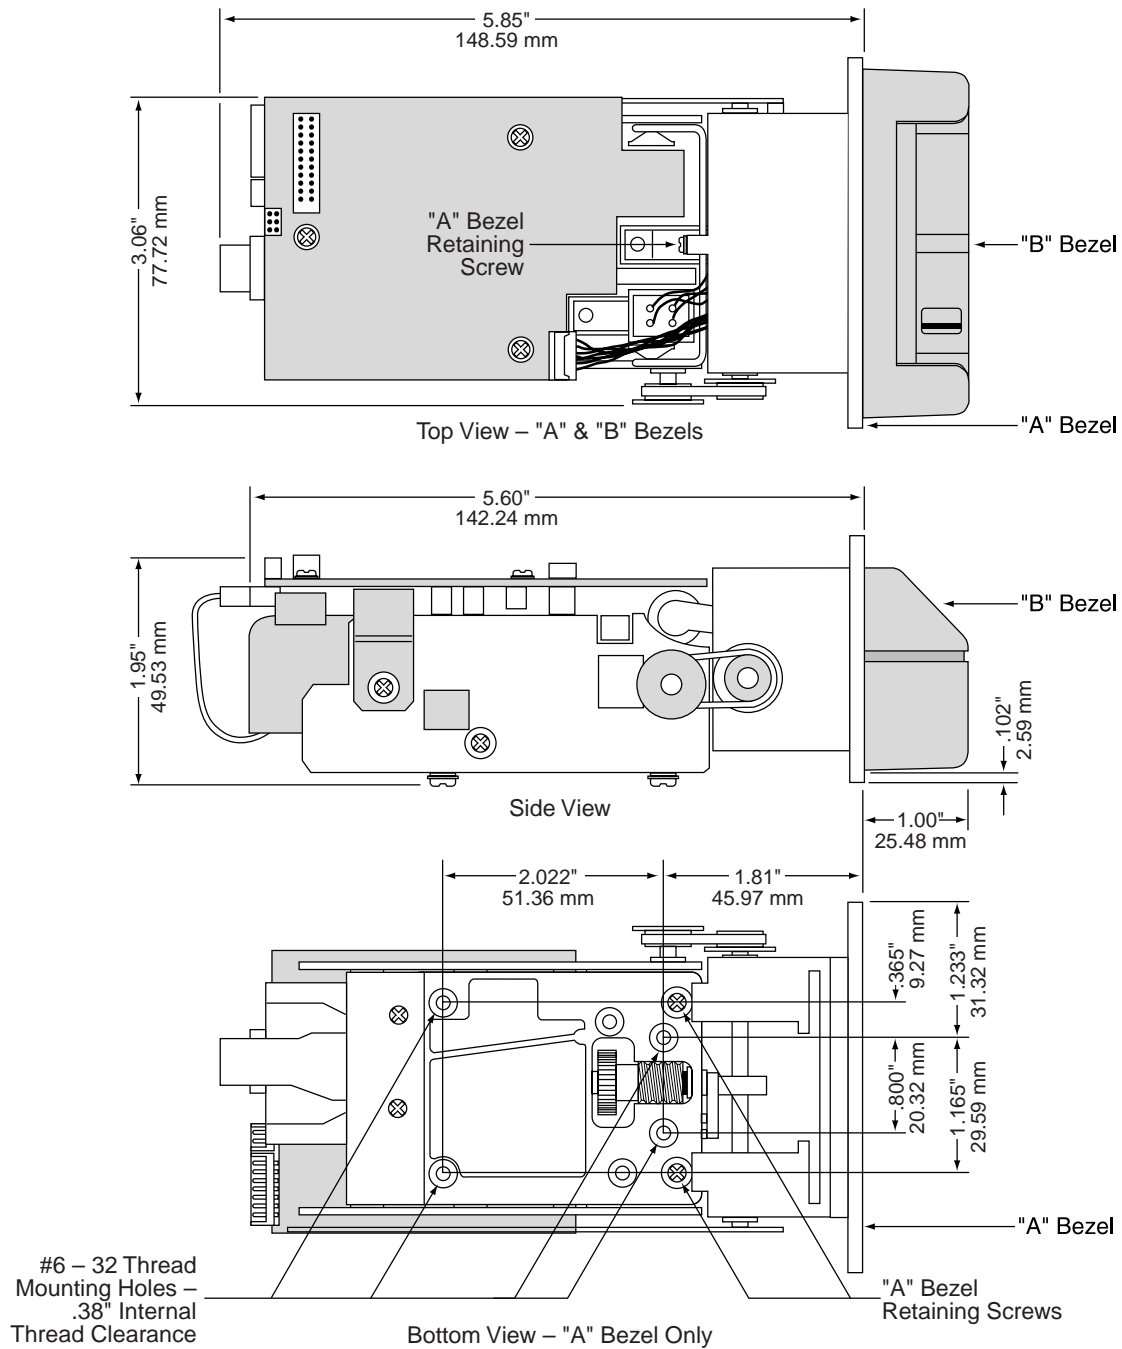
“B” Bezel Mounting – Top, Side, and Bottom Views
